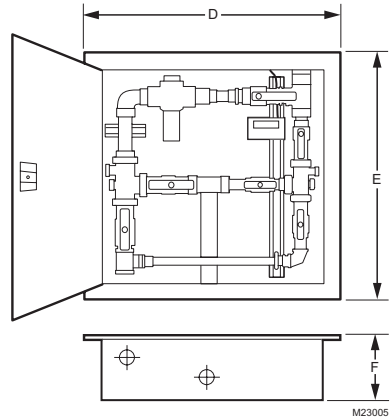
HL 150, 200 & 250 cabinet option dimensions
